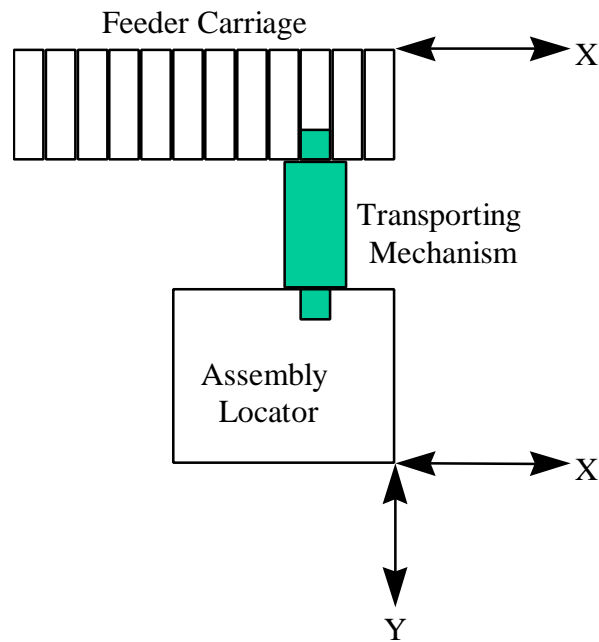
Printed Circuit Card Assembly Line [24]
